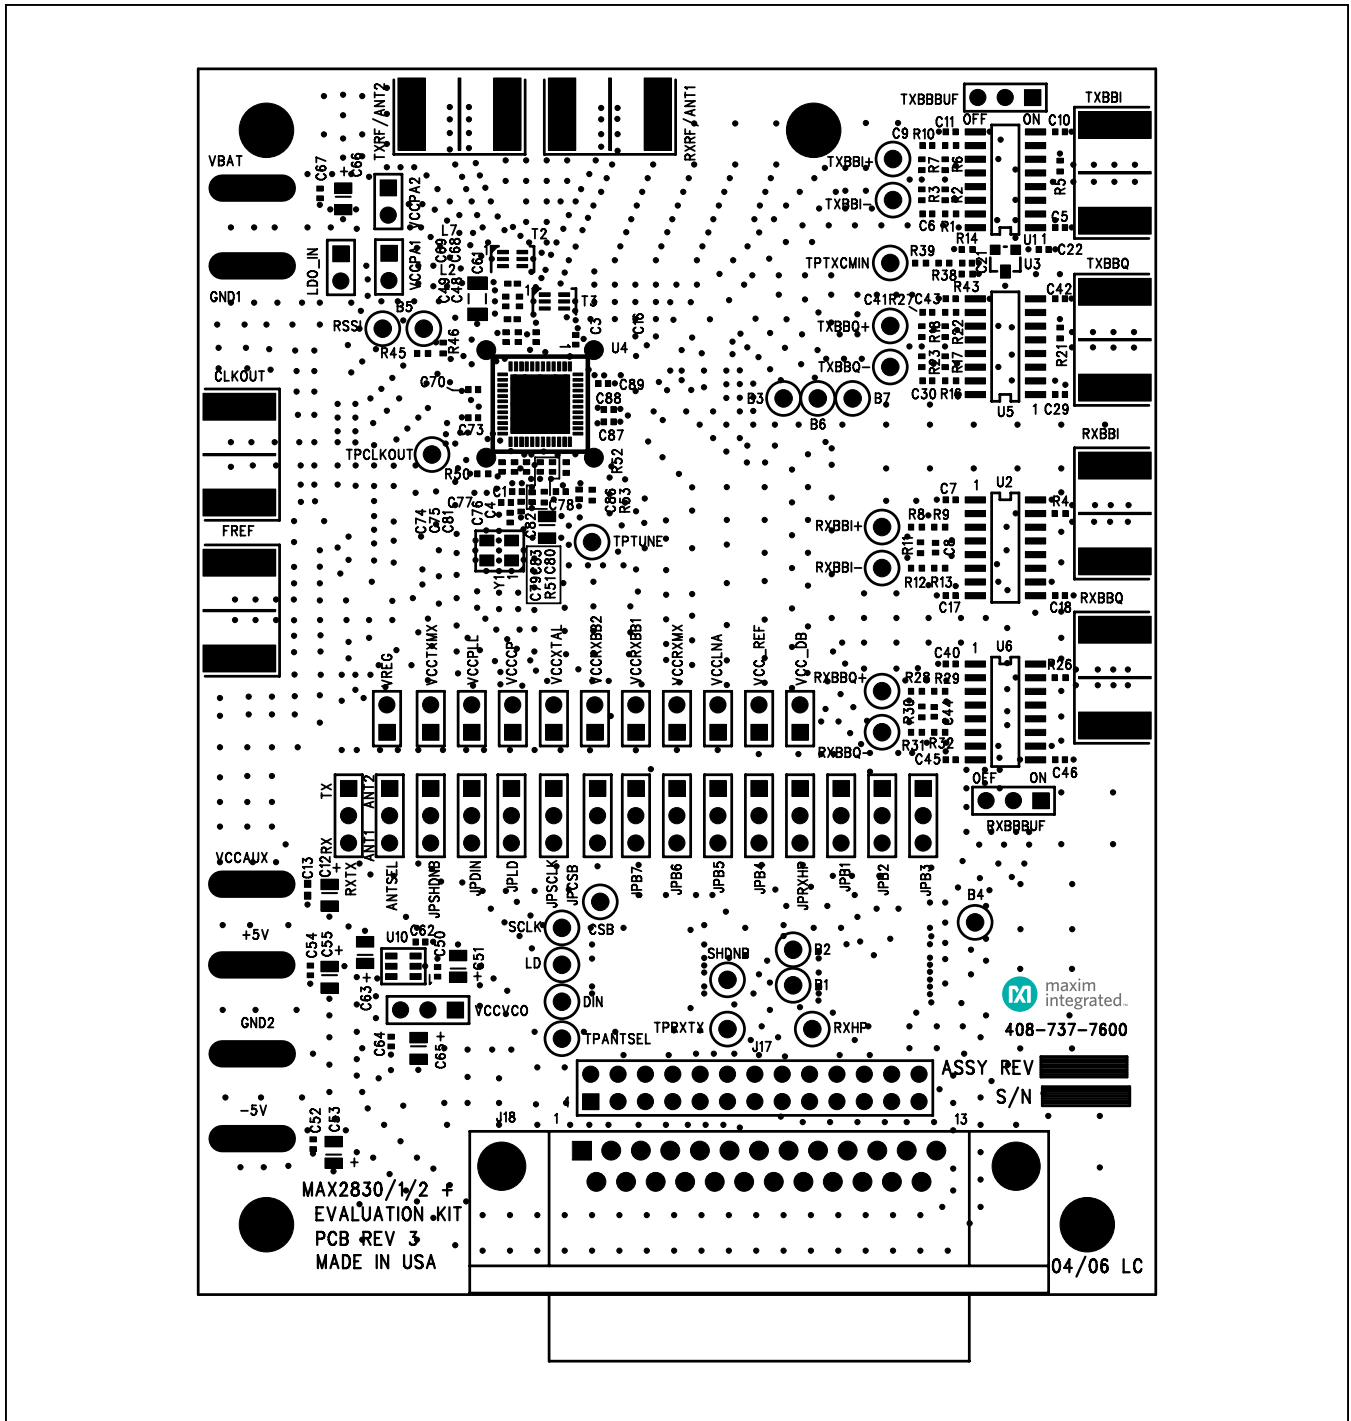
MAX2831 EV Kit PCB Layout—Top Silkscreen
